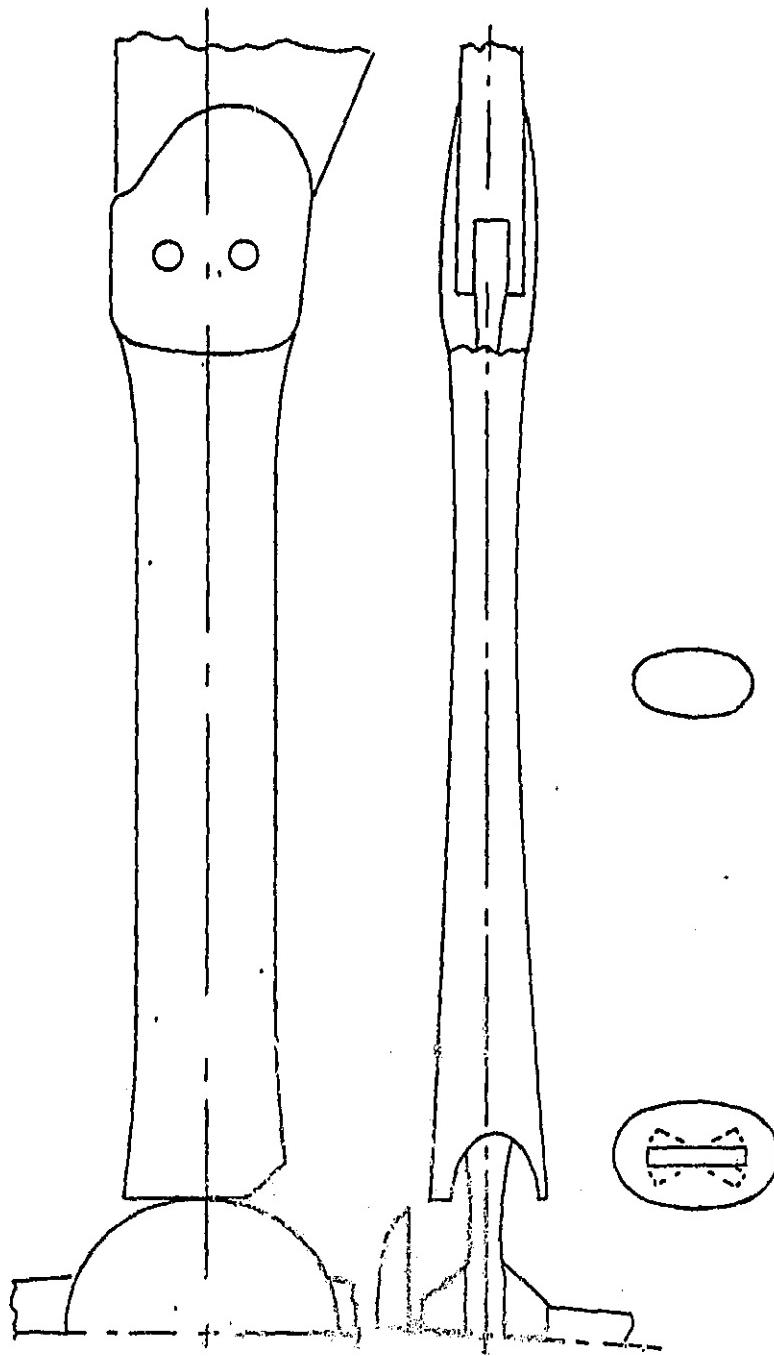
FRR Cuff Shape for Bearingless Hub Without Dampers
